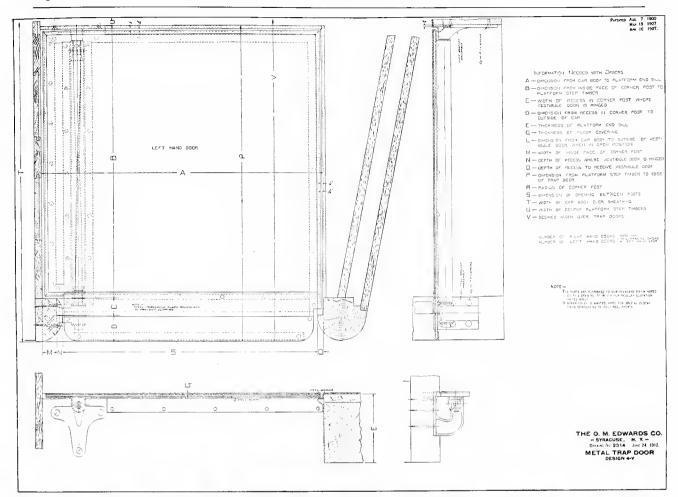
Metal Trap Door for Elevated Platforms. O. M. Edwards Company.
